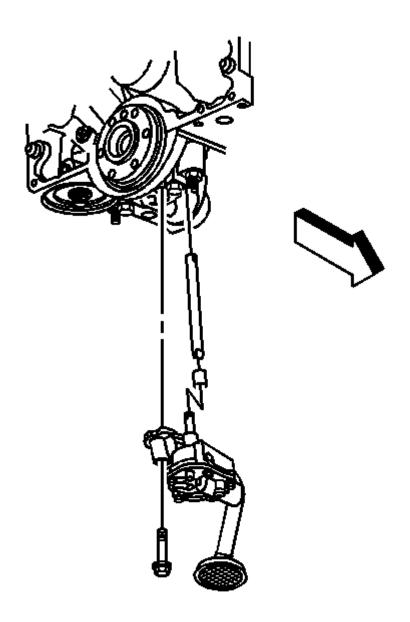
View Of Oil Pump, Bolt, Retainer & Driveshaft Courtesy of GENERAL MOTORS CORP.
